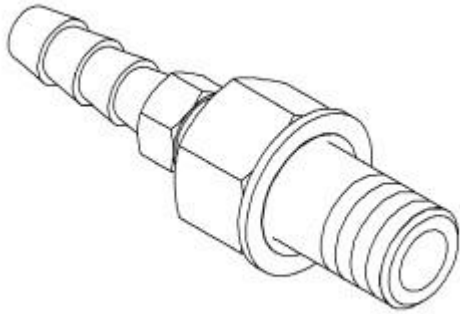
ADAPTER, FUEL PRESSURE TEST - 9013
